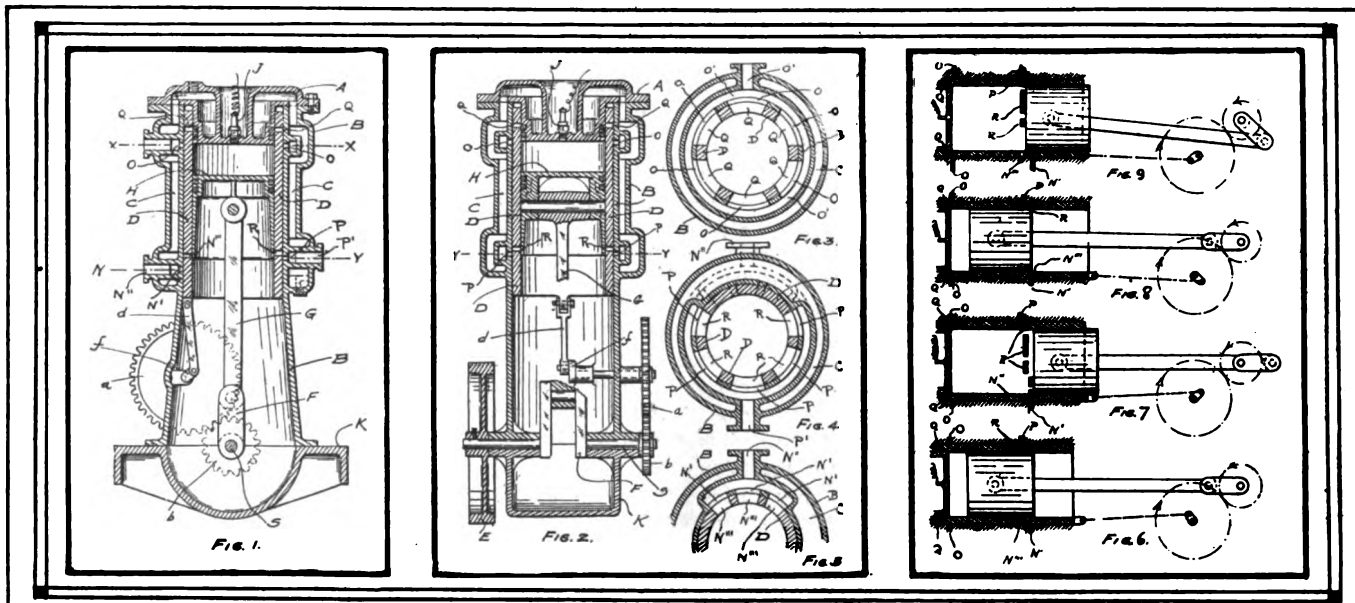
is a sectional elevation of the motor taken in a plane at right angles to the axis of the crank shaft; Fig. 2 is a sectional elevation of the engine taken in the plane of the axis of the crank shaft; Fig. 3 is a horizontal section of the device taken on the plane X X (Fig. 1), with the ports Q on the same level as the ports O; Fig. 4 is a horizontal section of the device taken on the plane Y Y (Fig. 2), with the ports R on the same level taken on the plane N (Fig. 1), with the ports N'' on the same as the ports P; Fig. 5 is a horizontal section of the device level as the port N'; Fig. 6 is a diagrammatic section in elevation of the device at the top of the compression stroke, at about the moment of firing; Fig. 7 is a diagrammatic section in elevation of the device at the bottom of the explosion stroke; Fig. 8 is a diagrammatic section in elevation of the device at the top of the exhaust stroke; Fig. 9 is a diagrammatic section in elevation of the device just before the bottom of the intake stroke.
